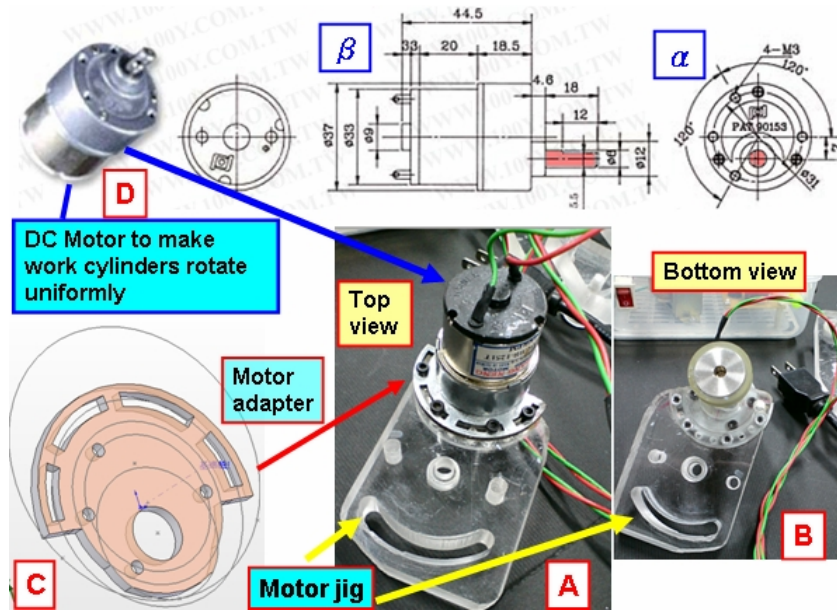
(A) top view of whole assembly of motor and its relevant components. (B) its bottom view (C) 3D plot of motor adapter (D) DC motor (α , β) top and side views of motor, respectively.
